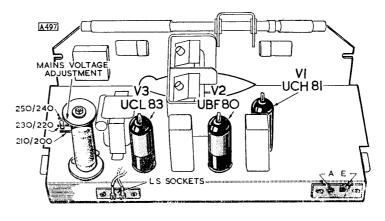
Rear view of receiver chassis, showing locations of valves, etc.
